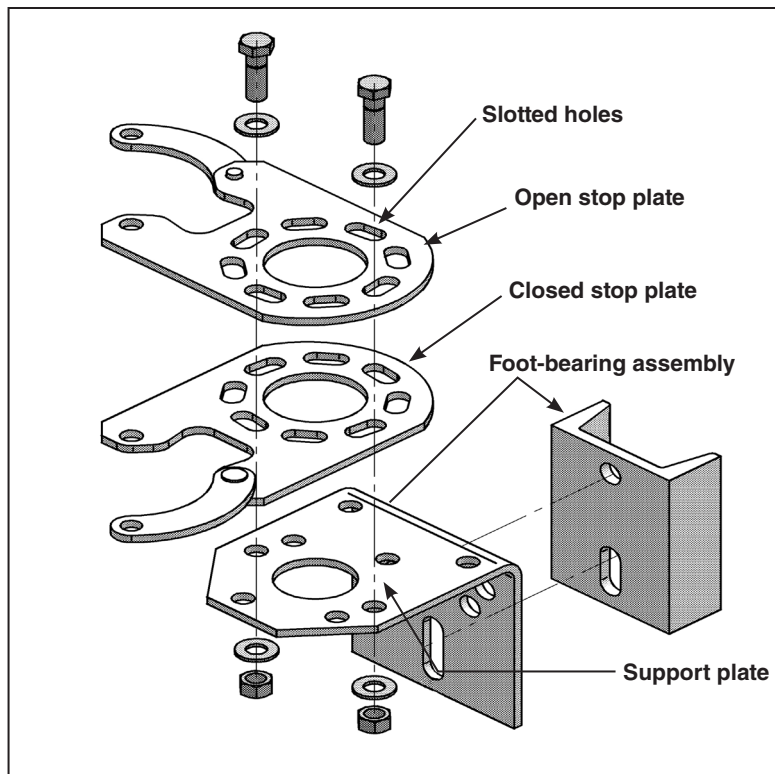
Exploded view of stop plates and foot-bearing assembly.
